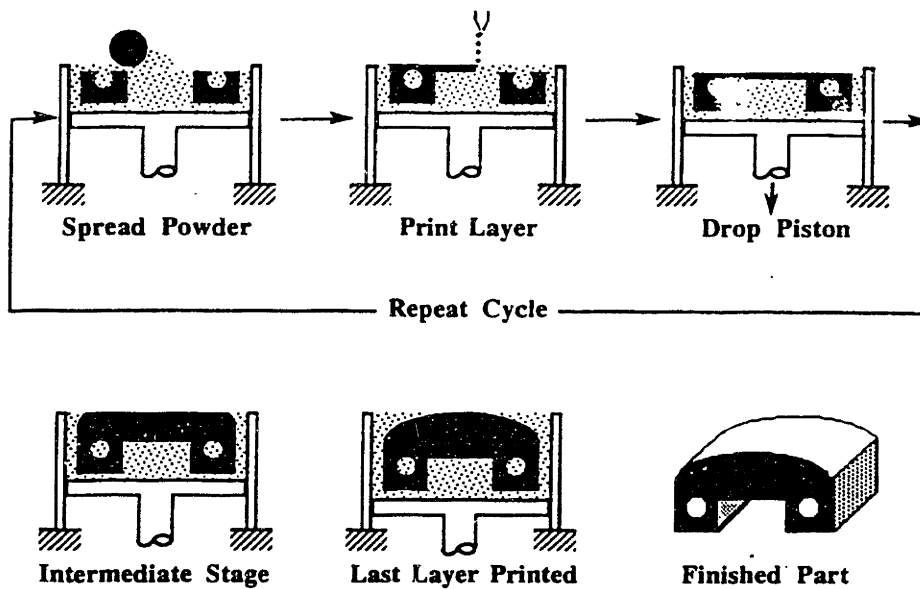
The Three Dimensional Printing process for metal tooling (3DP™)
